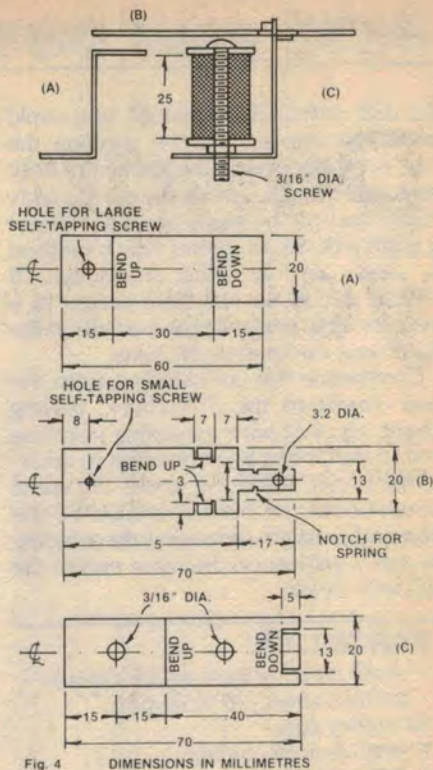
This drawing shows the general configuration and suggested dimension of the metalwork used in our relay.
